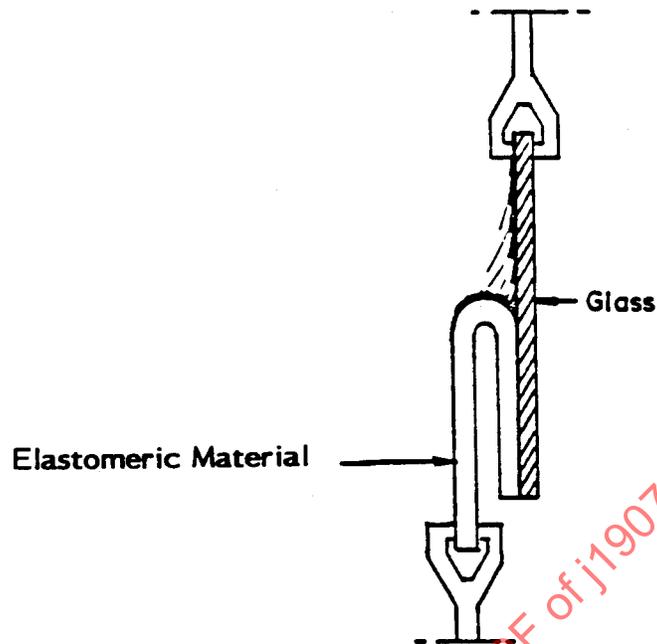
TESTING SPECIMEN ON TENSILE TESTER
